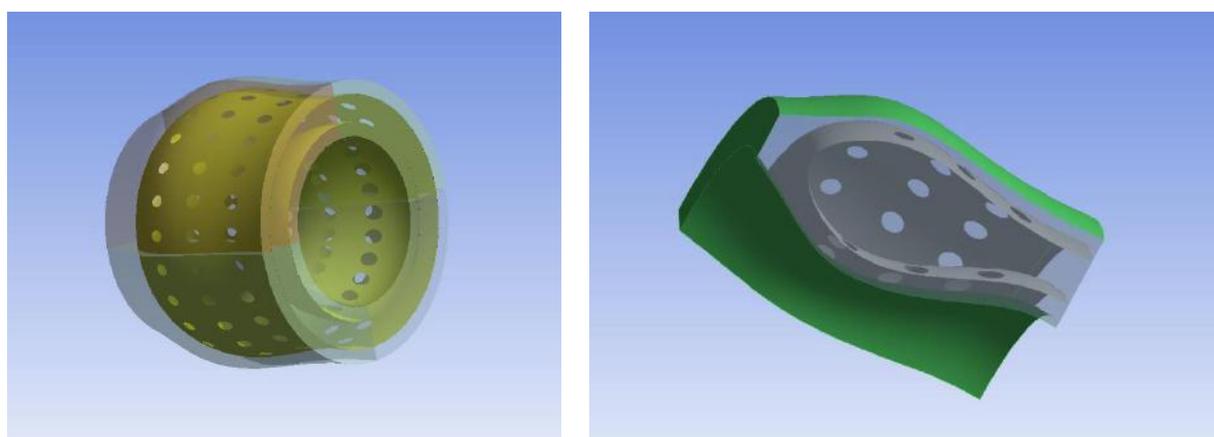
The 3D view (a) and lateral view (b) of the flame tube
